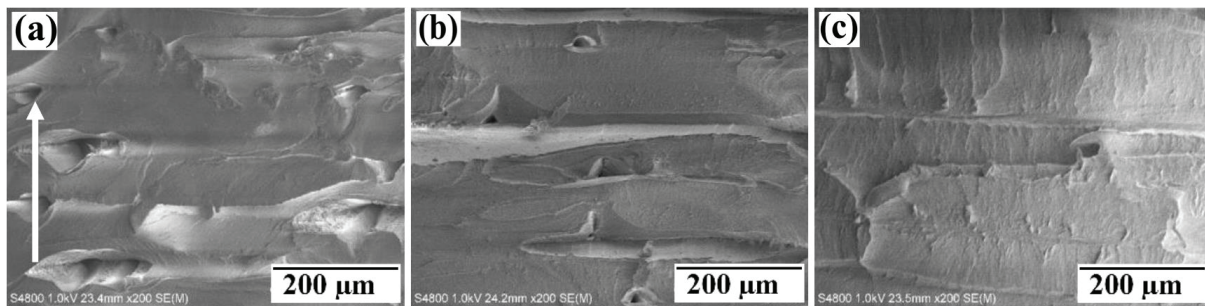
Fracture surfaces of ABS samples printed at; printing speed (3200 mm/min), layer thickness (0.1 mm) and raster direction of (a) 0° , (b) 45° , and (c) 90° . The arrow indicate the building direction.
